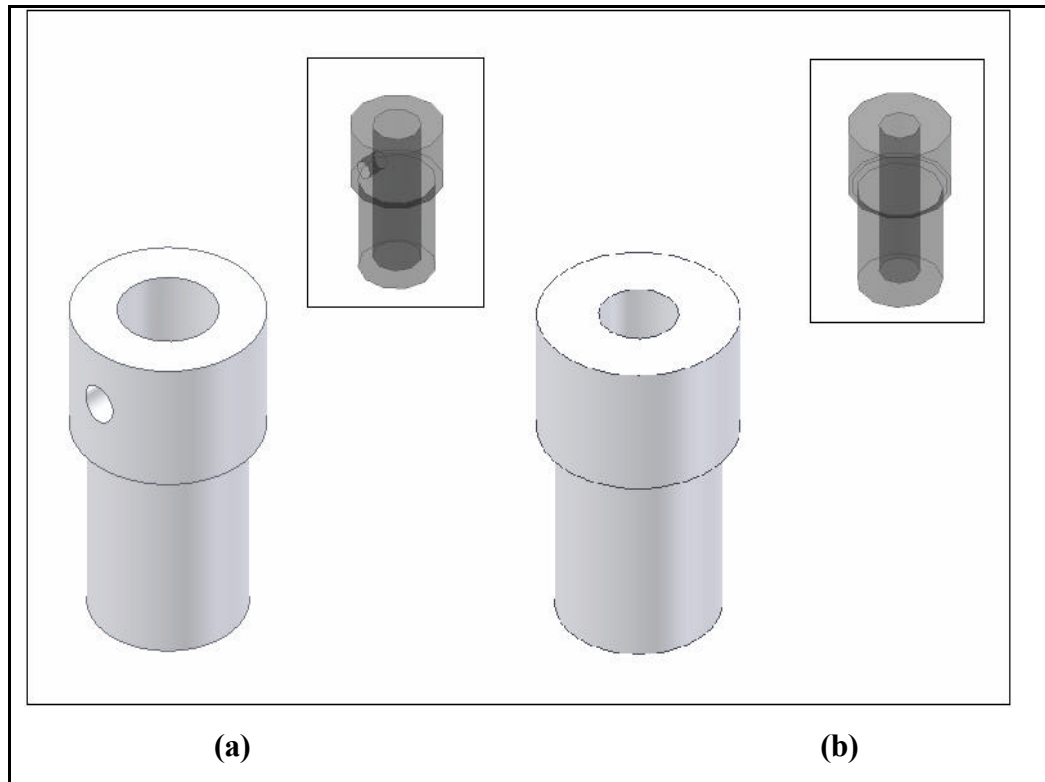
Drawing of crucibles (a) for centrifugal casting of specimens (b) for furnace cooling of alloys
